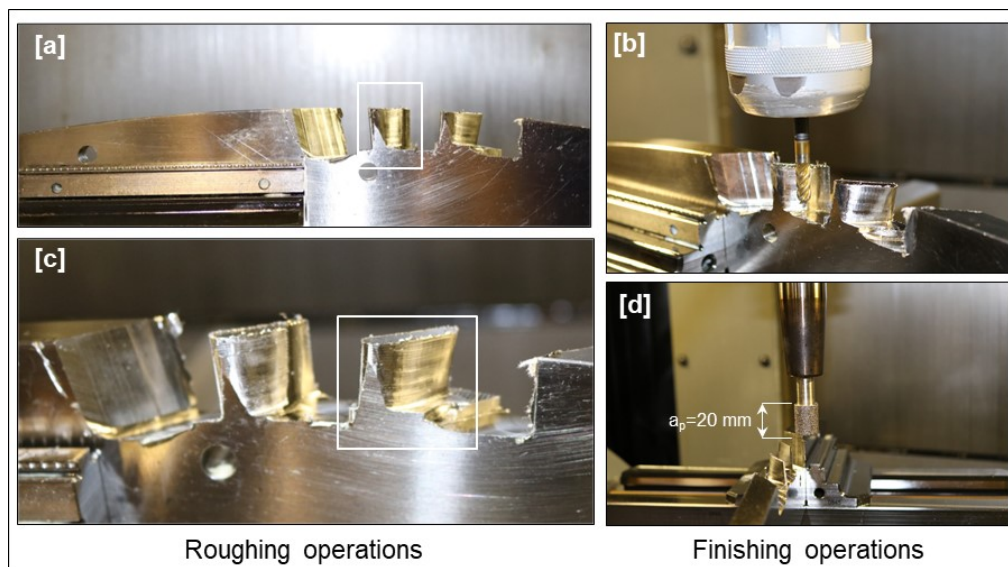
Blades manufacturing process. (a) Roughing-Milling; (b) Finishing-Milling; (c) Roughing-Flank SAM; and, (d) Finishing-SAM.
